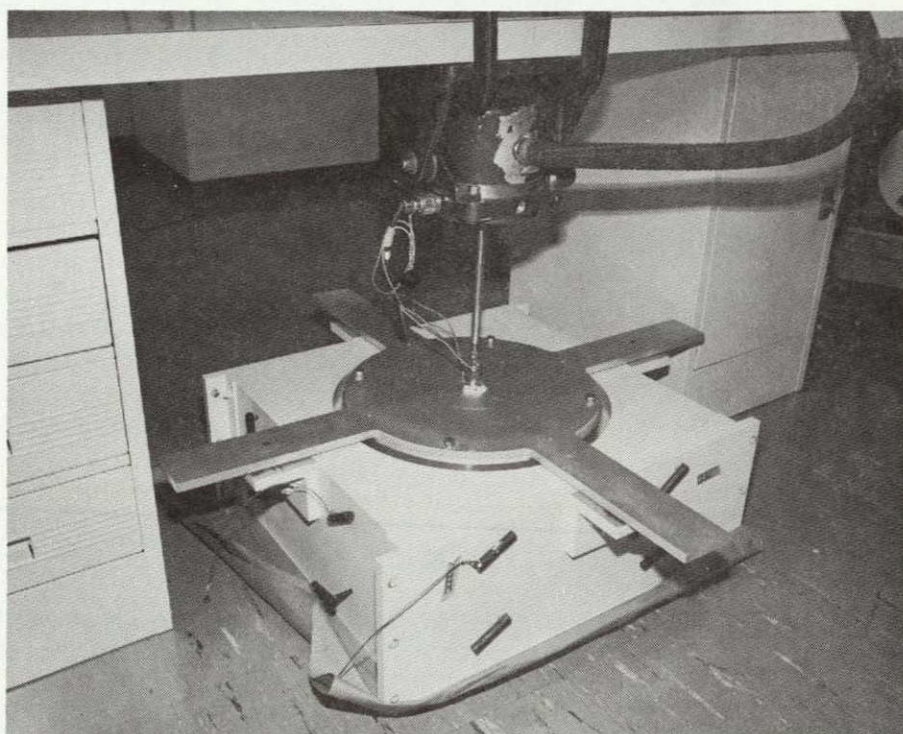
MOLD SETUP FOR CASTING 1/2 SCALE HEAT SHIELD NO. 1
